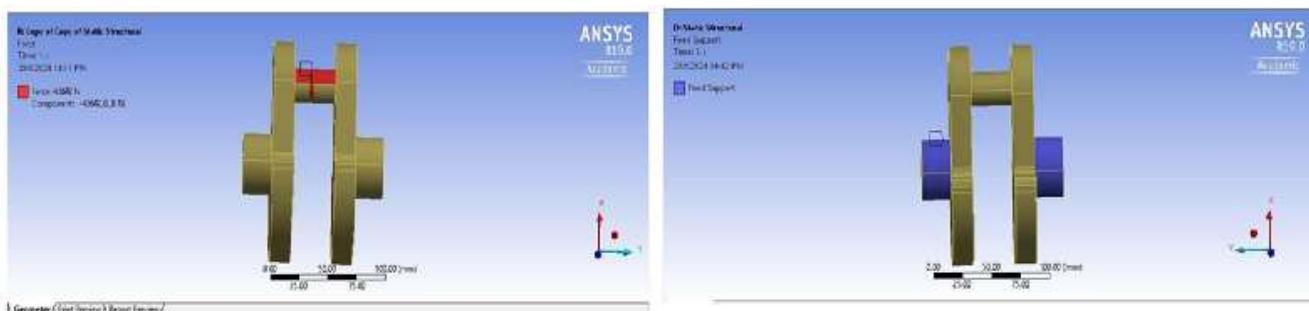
Applying force for Case-3 & Fixed support of Crankshaft
